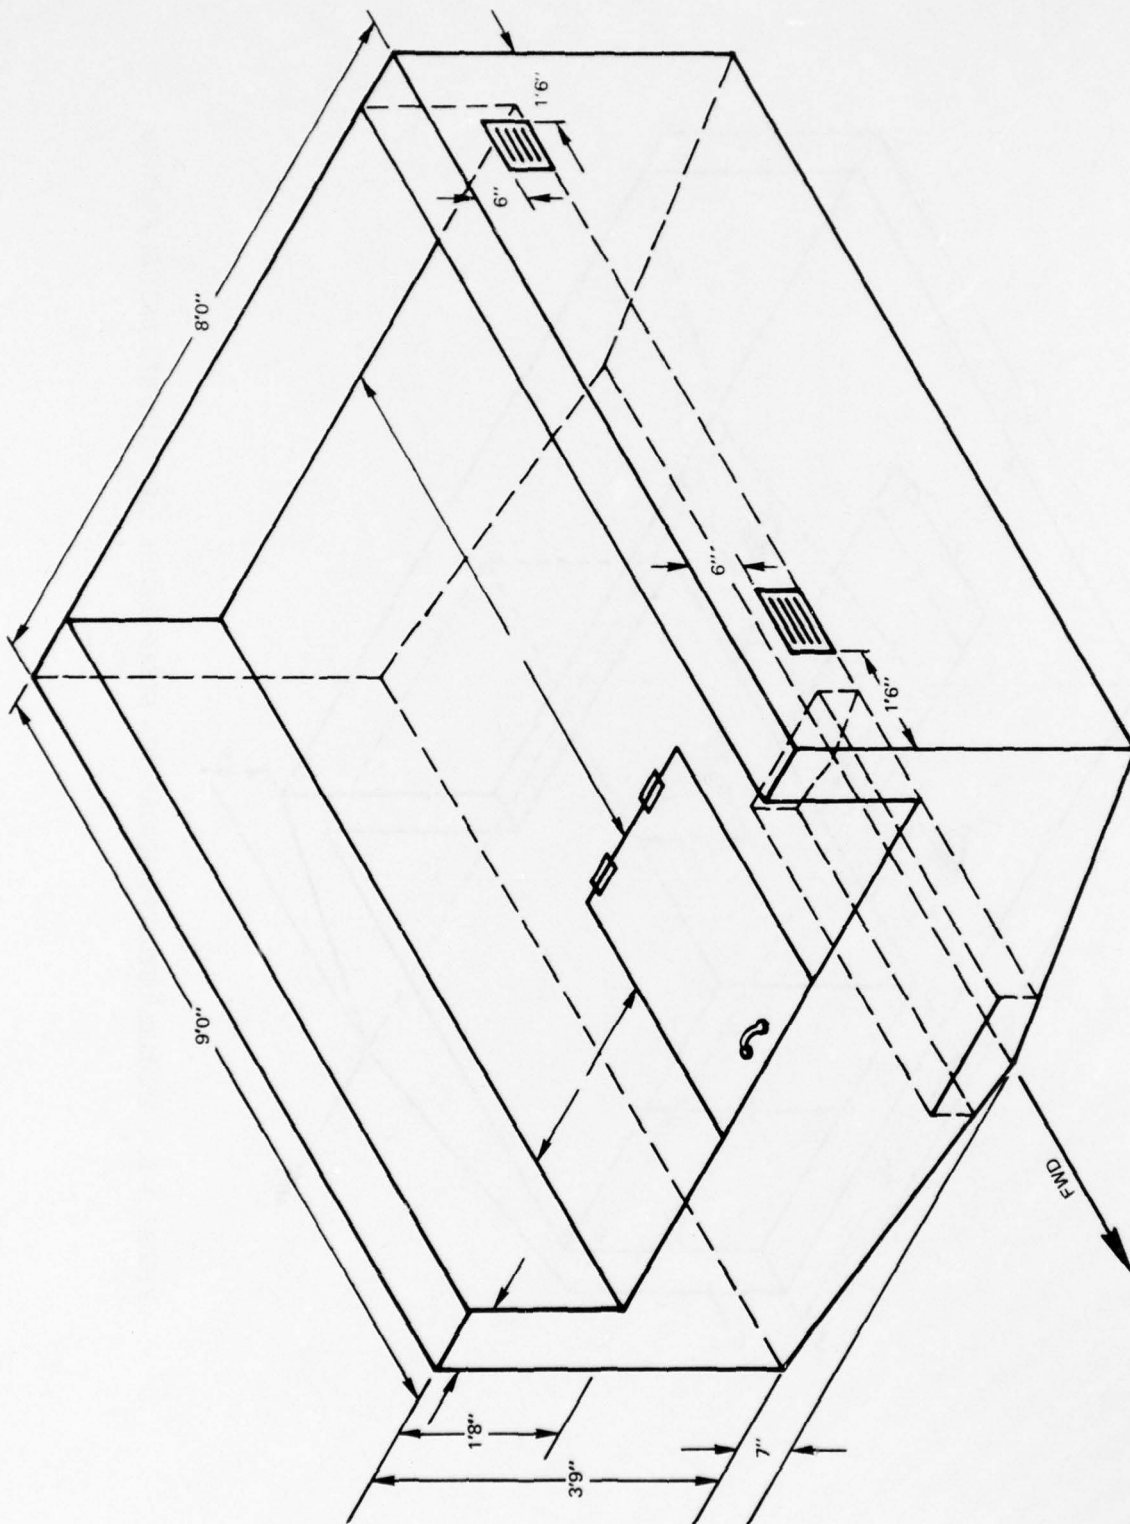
C. BELOW DECK ENGINE COMPARTMENT, ENGINE REMOVED
